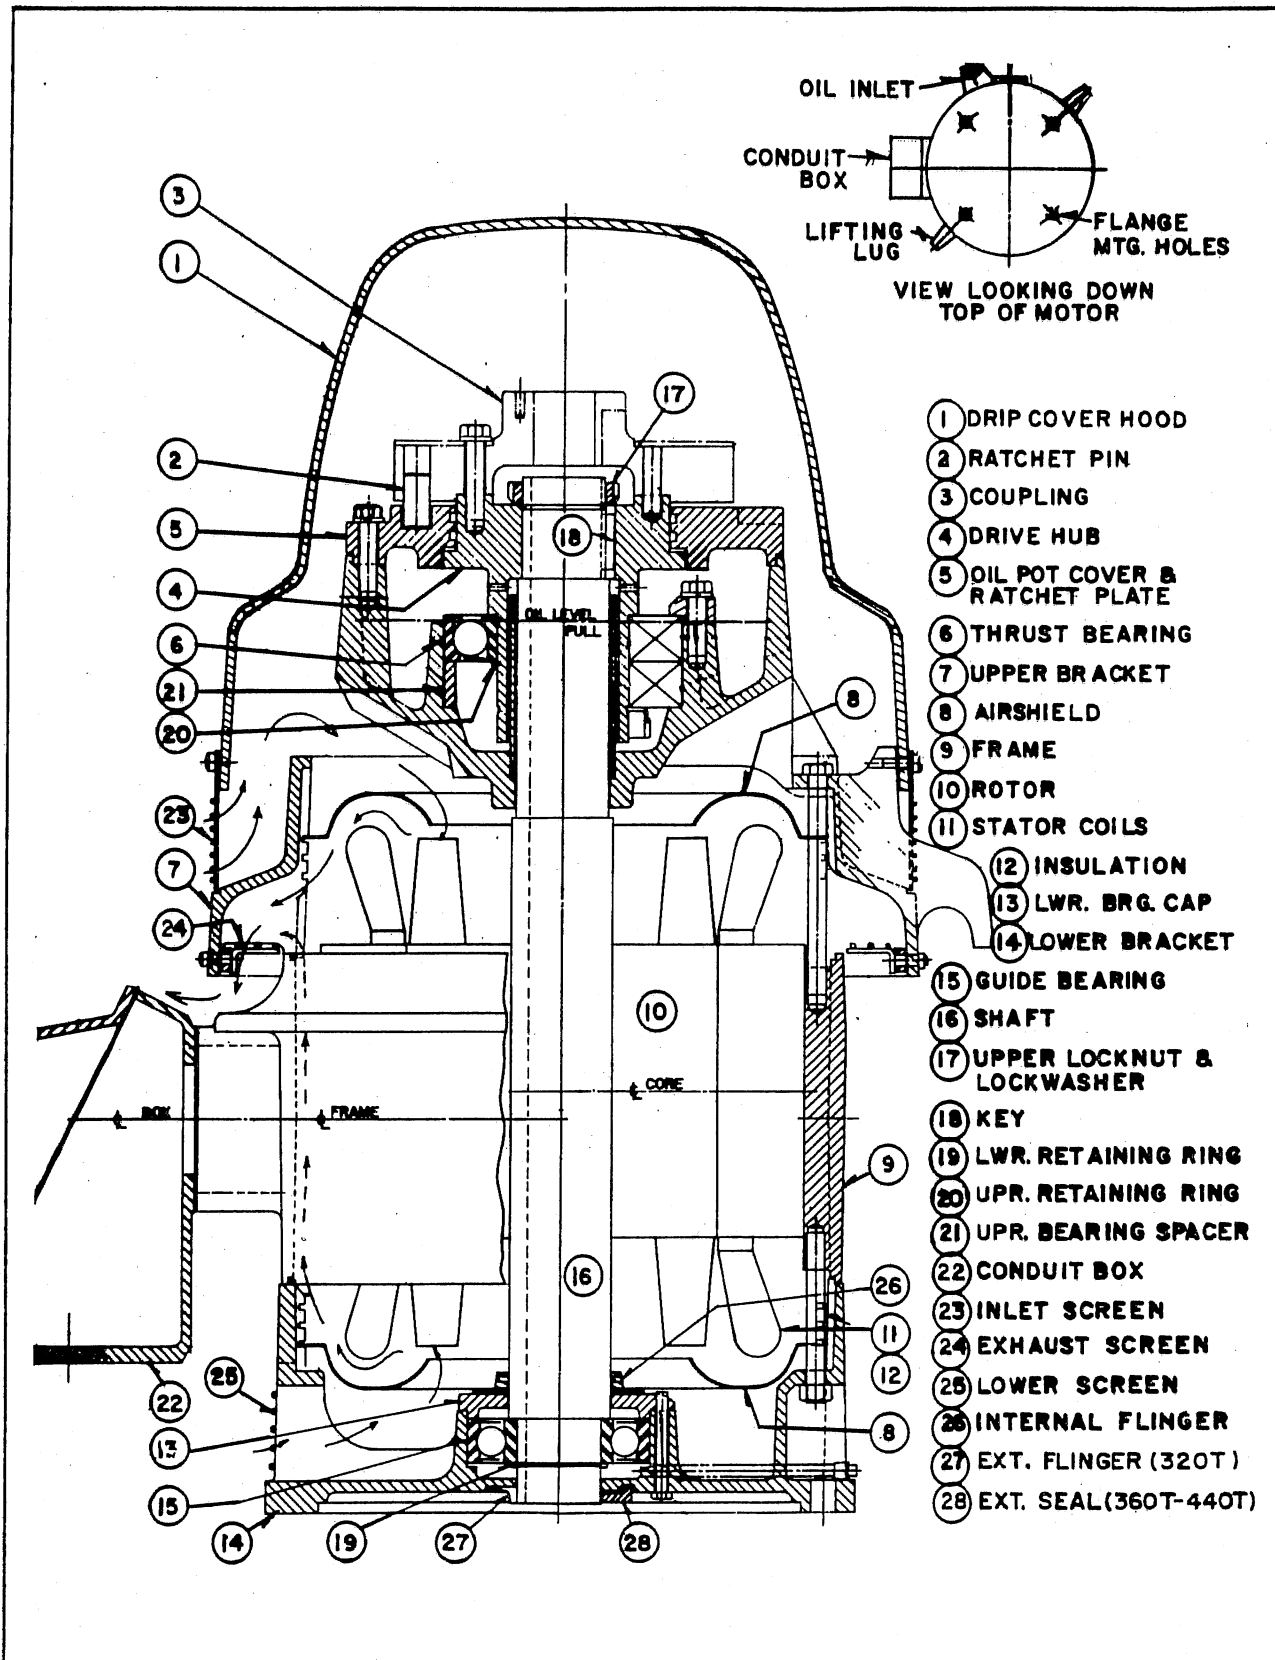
Arrangement of Parts, Vertical Hollow Shaft Dripproof Type T Life-Line Motor, Frames 324T thru 445T (Solid Shaft Motors Use Same Construction Except Top Coupling and Ratchet Pins are Omitted)
